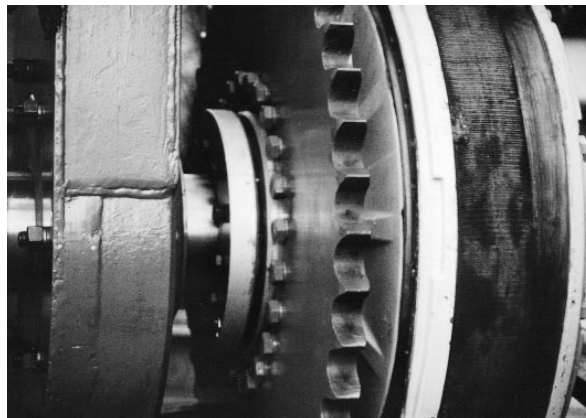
· RINGFEDER® Shrink Disc · Double clamping
